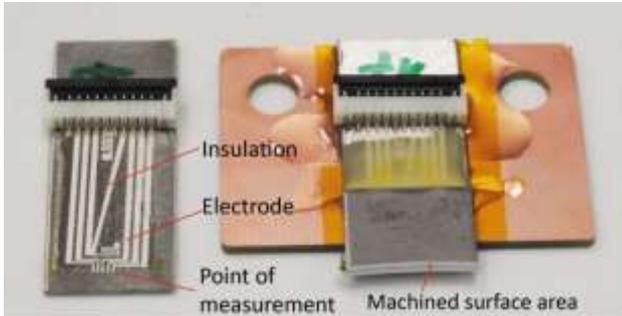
Workpiece during fabrication (left) and the final workpiece after machining (right)
